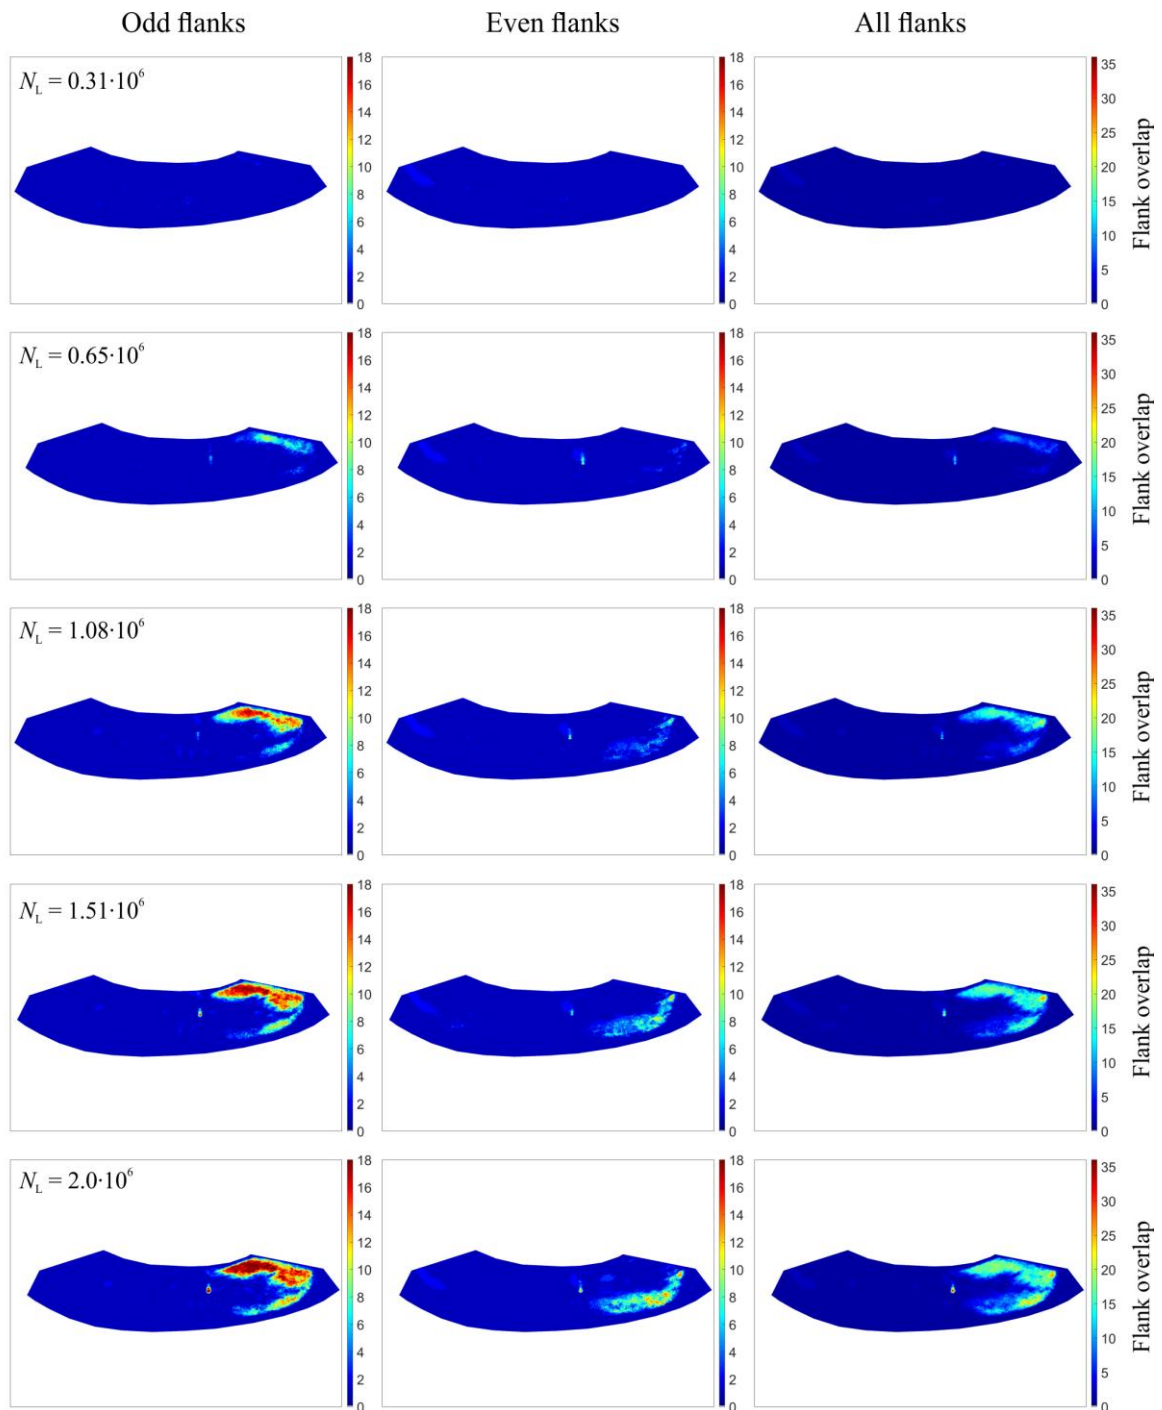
Pitting location (overlapped) on flanks of worm wheel 1
